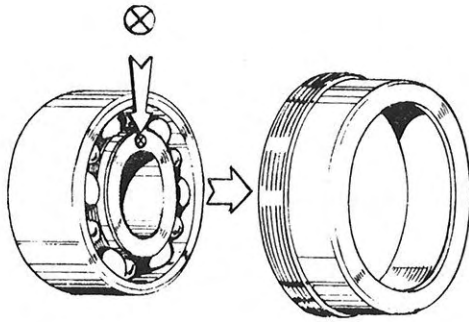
Location of pinion shaft bearing in bearing sleeve
